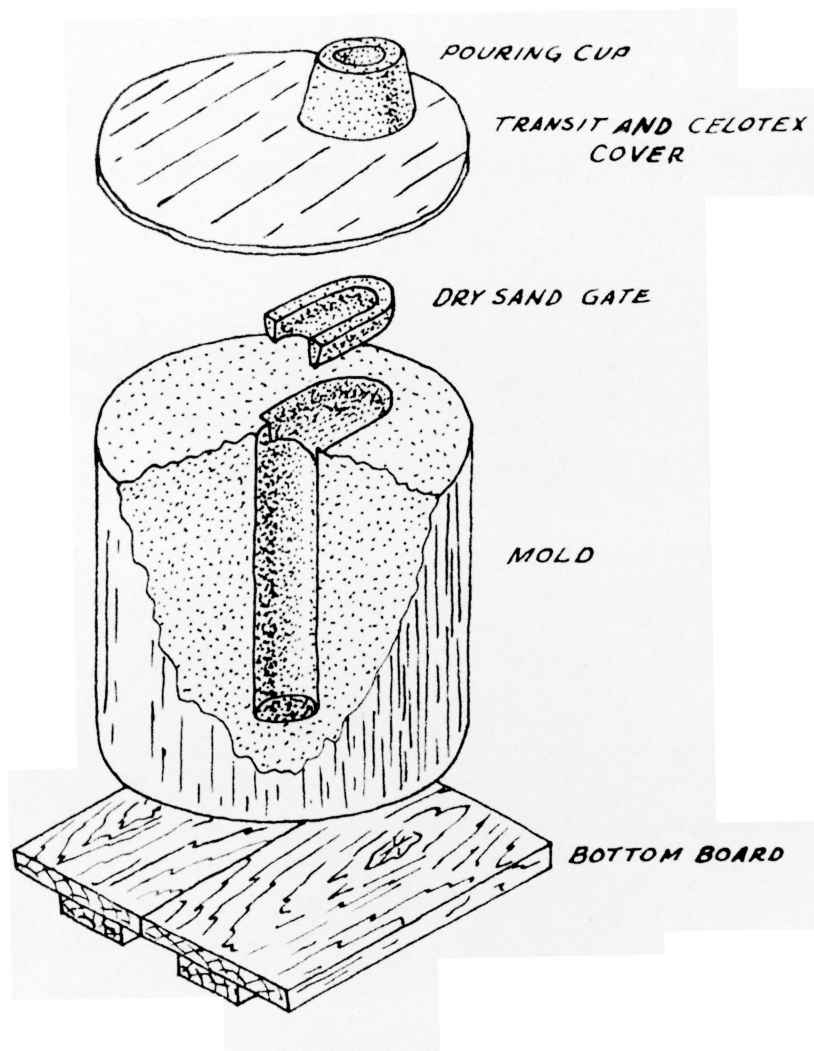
EXPLODED CUTAWAY VIEW OF TEST MOLD
